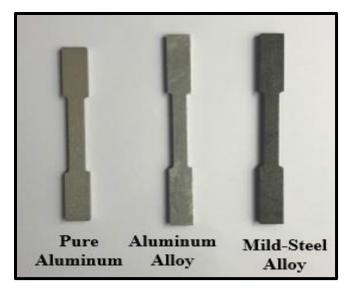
Dumbbell shape that being used at Universal Tensile Machine (UTM) for tensile test.
